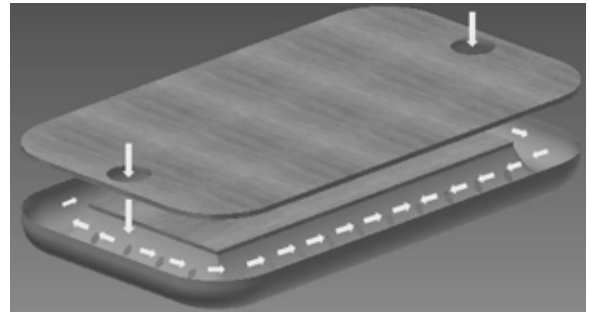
Prototype 1 (exploded view, isometric view) showing indicative air flow in the skirt
